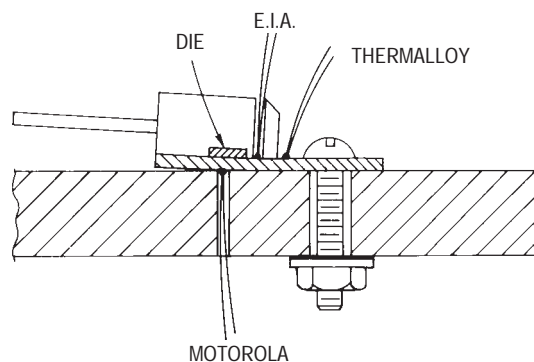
JEDEC TO-220 Package Mounted to Heatsink Showing Various Thermocouple Locations and Lifting Caused by Pressure at One End
